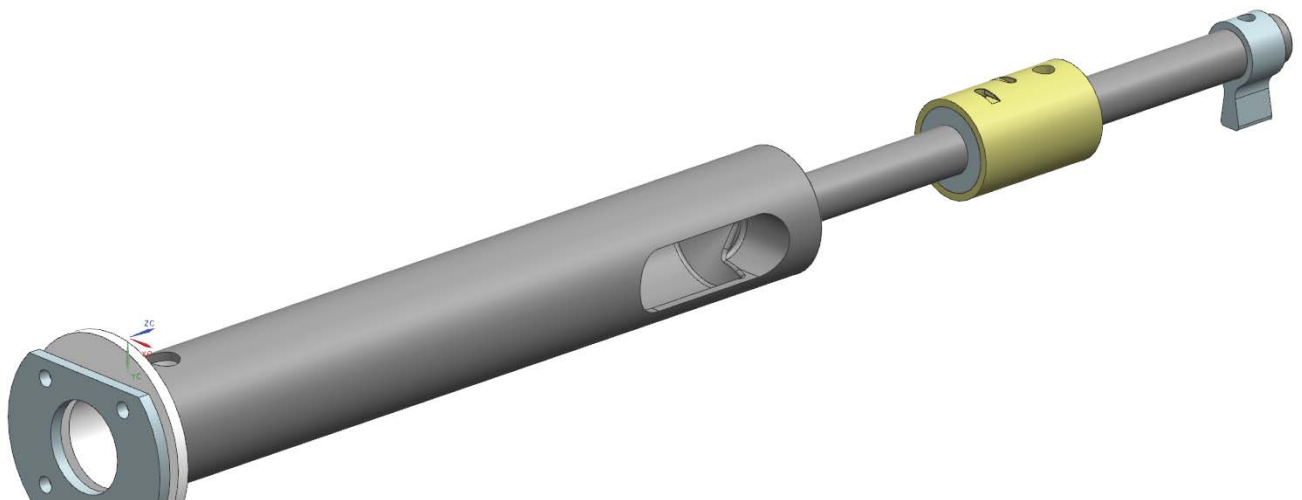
3D model of the steering column, with sub parts assembled
